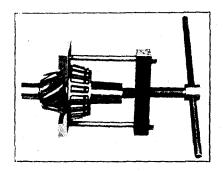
Removing Pinion Forward Bearing with Puller 83228
